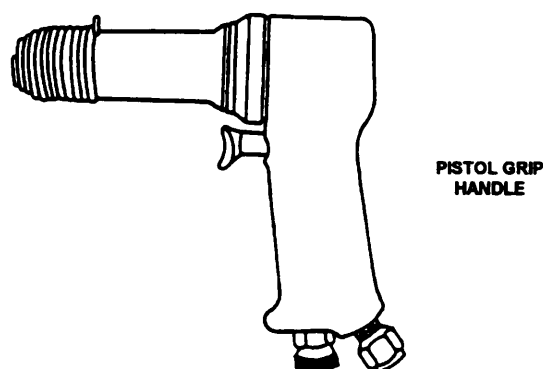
Hammer, pneumatic, portable (riveting hammer).
